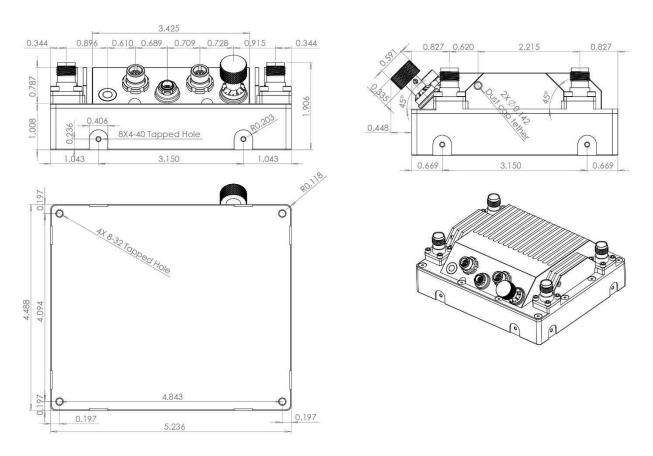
SC4400E Mechanical Drawing (top) and Mounting Pattern (bottom)
